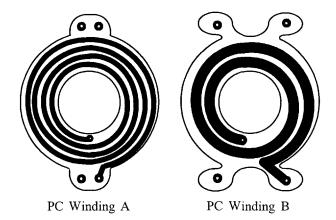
PC Winding Boards Showing Butterfly Pads.
